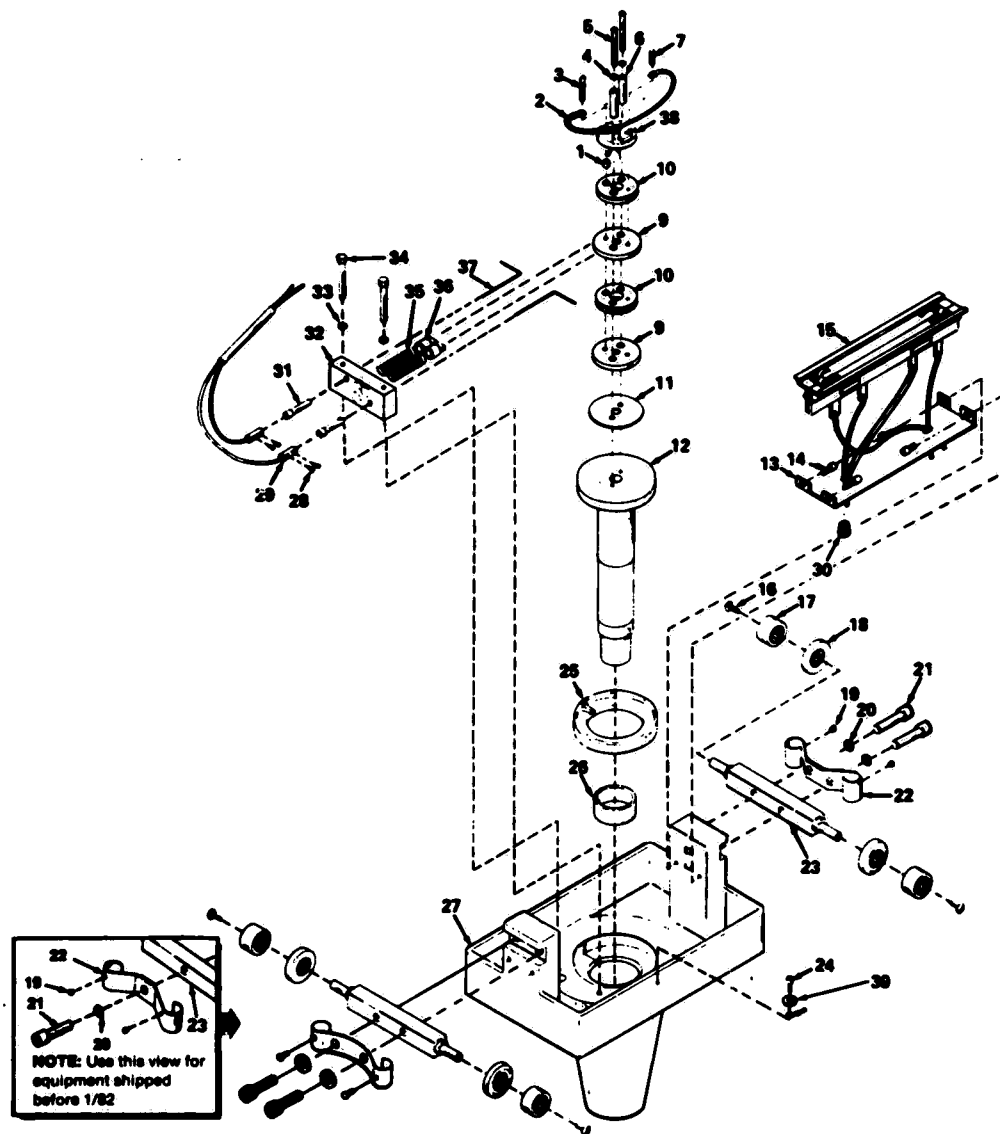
A. CARRIAGE ASSEMBLY, Units Shipped Between 3/73 and 7/82.
